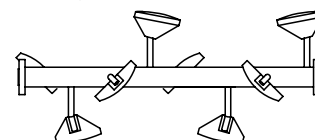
### DETAILS OF STANDARD MIXALL CONSTRUCTION
